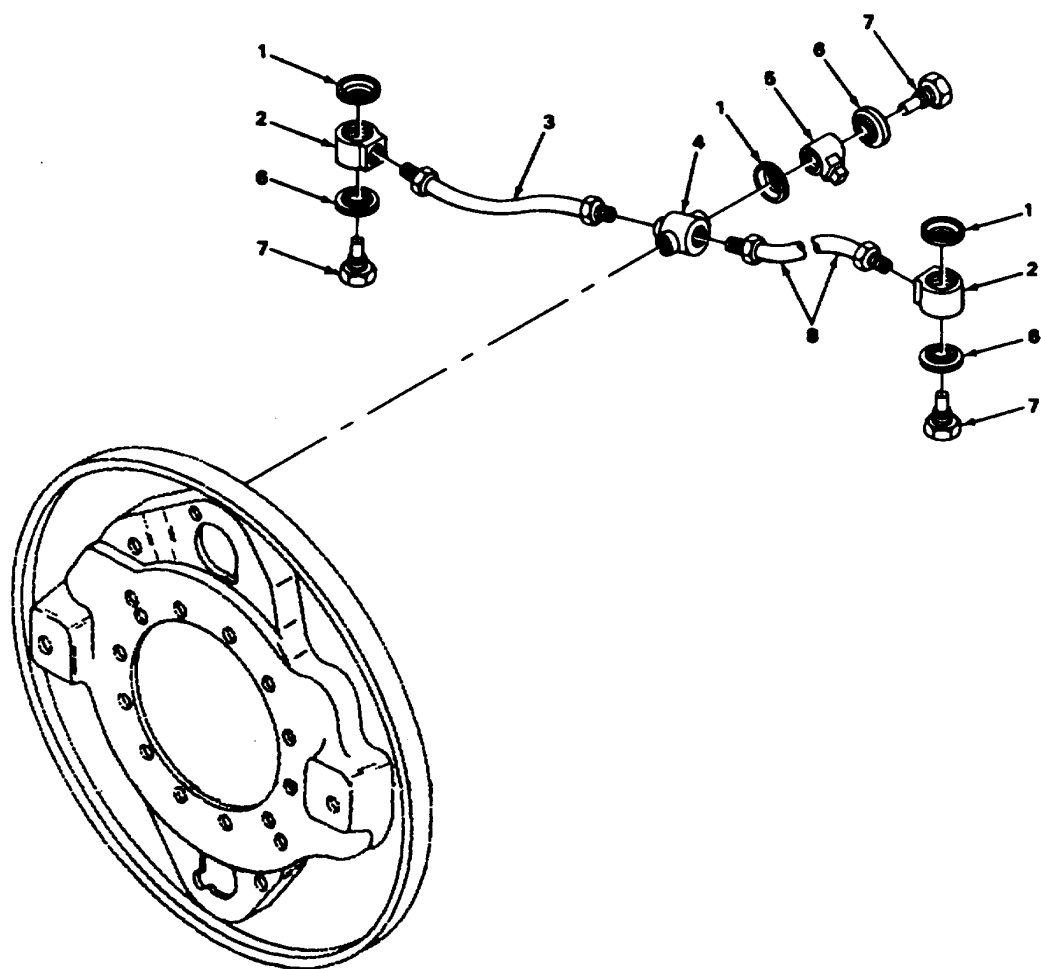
HYDRAULIC BRAKE LINES AND FITTINGS.
